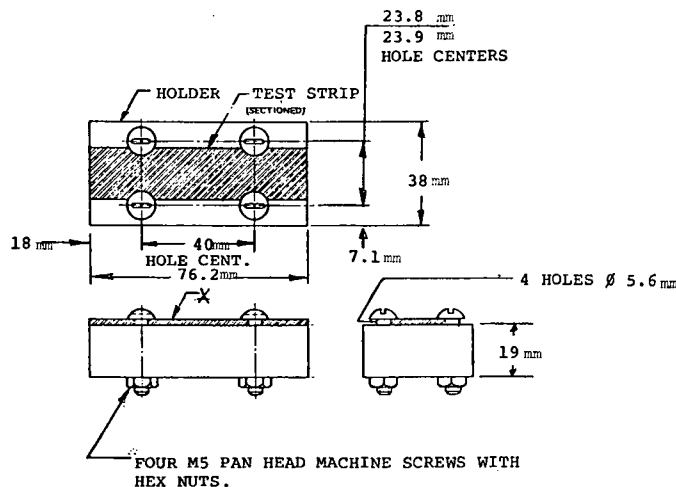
ASSEMBLED TEST STRIP AND HOLDER
